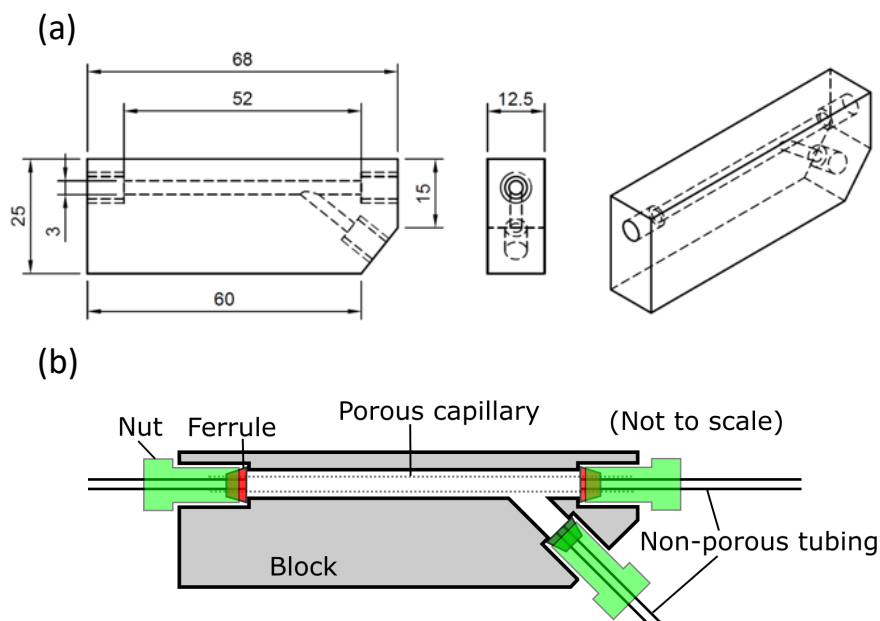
Design and assembly of the separation block (a) Technical drawing of separation block. Dimensions are in millimetres, and all threads are $\frac{1}{4}$ "-28 UNF standard. The block is machined by hand from a single aluminium block, using a hacksaw to make the 45° angle of the side-channel port and a pillar drill for the holes. Each port is subsequently tapped with $\frac{1}{4}$ "-28 (UNF) threads for connection of fluidic fittings. (b) Schematic showing fluidic connections to the separator block. The porous capillary is crimped to non-porous tubing at opposing ports using 2.5mm ID ferrules and corresponding nuts (see Assembly instructions below). The side-channel tubing is secured using a 2-mm-ID ferrule and nut.
